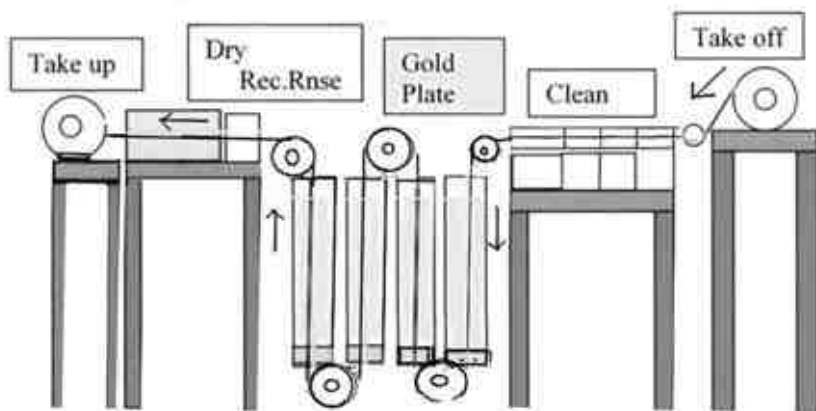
Gold plating on nickel-plated 0.015" copper wire; gold cyanide, 130°F; plating thickness, 0.000030"; plating speed, 10 ft/min (Designed by two Sylvania chemists about 1953).
